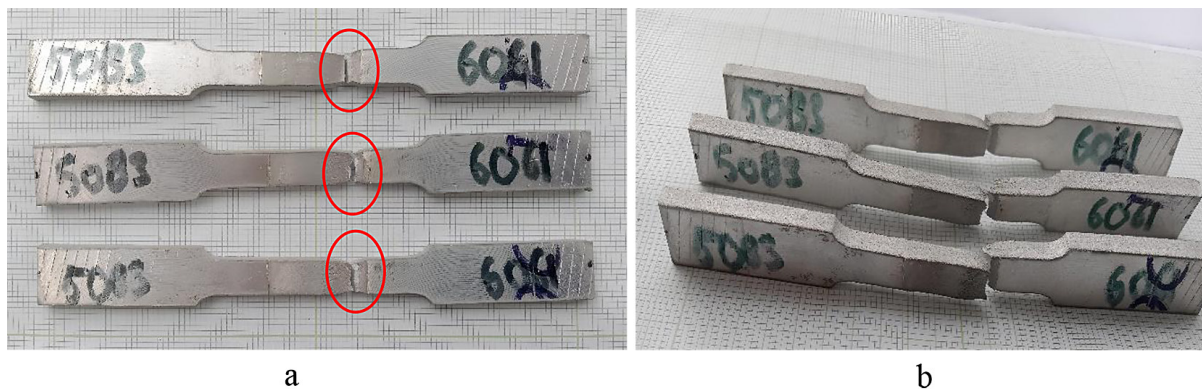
Fracture location of tensile specimens (a) front view, (b) side view
